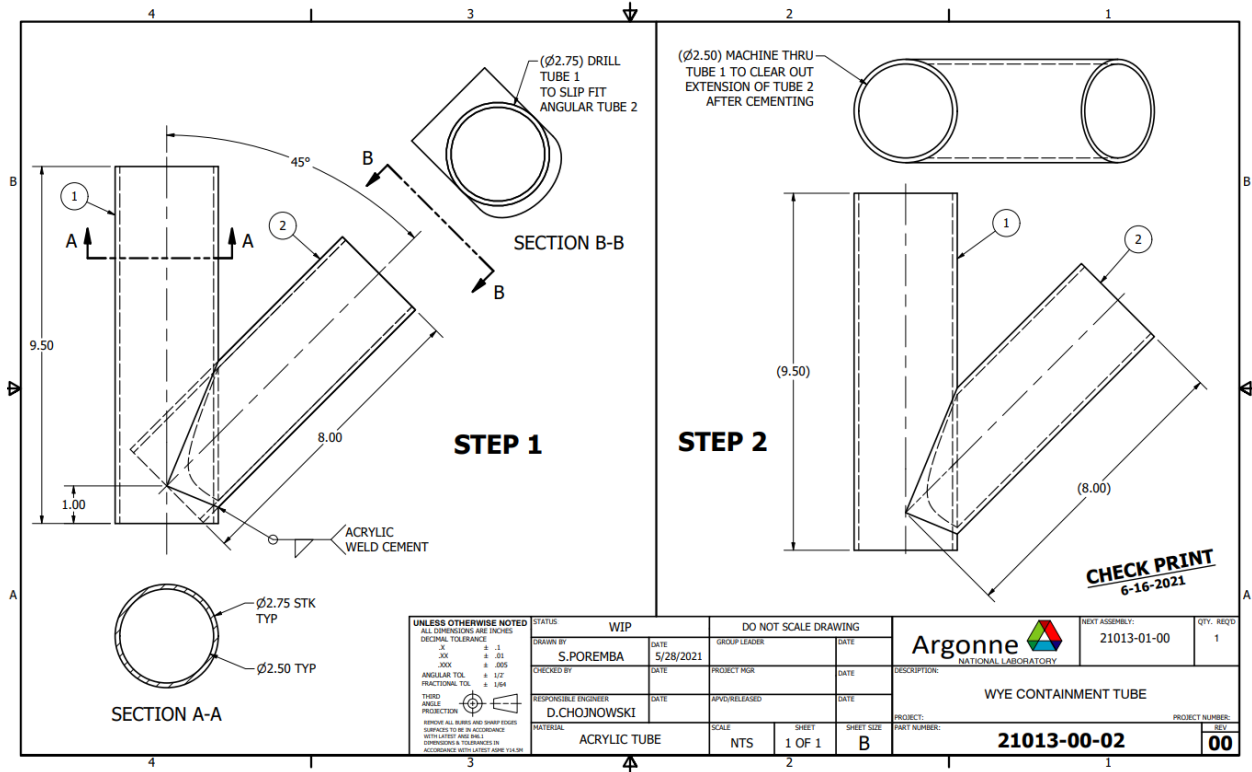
Fabrication drawing for polycarbonate tube Y assembly.
